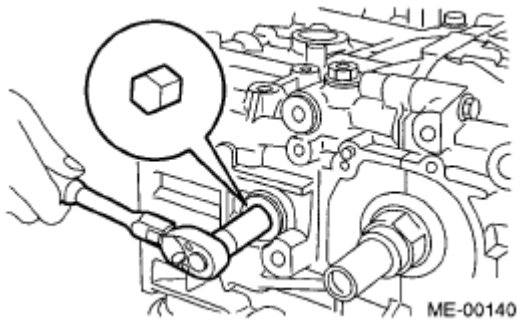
Removing Service Hole Plugs Using Hexagon Wrench
